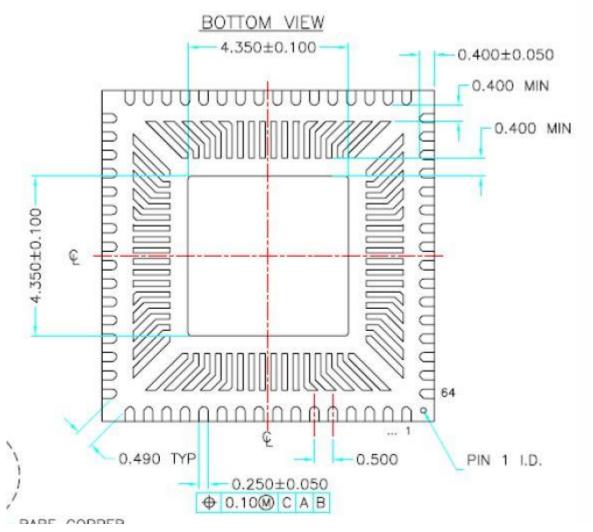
64-pin QFN (9mm x 9mm) Bottom View
